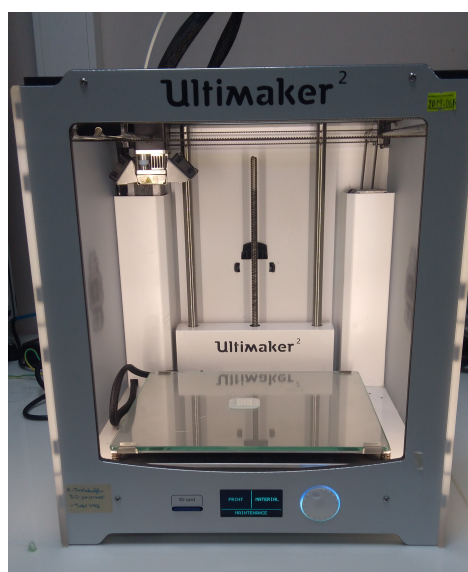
Single Extrusion 3D printing machine (Ultimaker 2-Go, Ultimaker, Netherlands).
